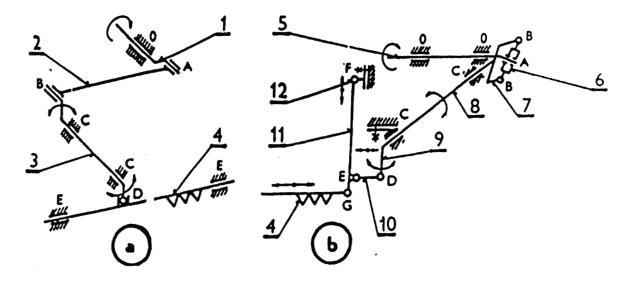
Diagram of spatial mechanisms with a rocking shaft. a) with a propelling crank b) with a diagonal bolt. 1-crank, 2-knuckle, 3-shaft, 4-scythe, 5-propelling shaft with a diagonal bolt, 6-bearings, 7-fork, 8-shaft, 9-rocking arm, 10-rod, 11-hinge, 12-sliding hinge Various mechanisms (propulsion) make the movement to the cut (shortened crank, diagonal bolt, hydraulic, cam ...), see Fig. 3.2..
